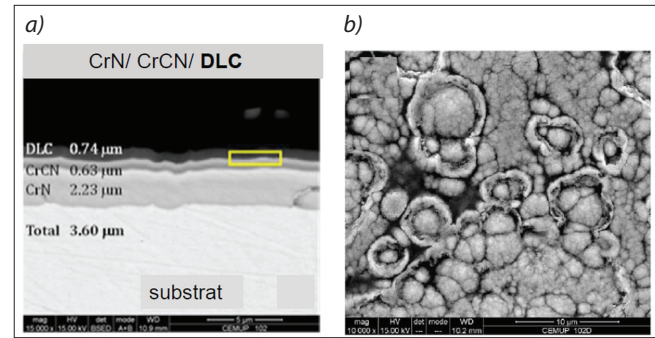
SME image of cross-section of multilayer CrN/CrCN/DLC coating (a) and view of the die-casting mould surface after 135,000 injection cycles (b) [22]
